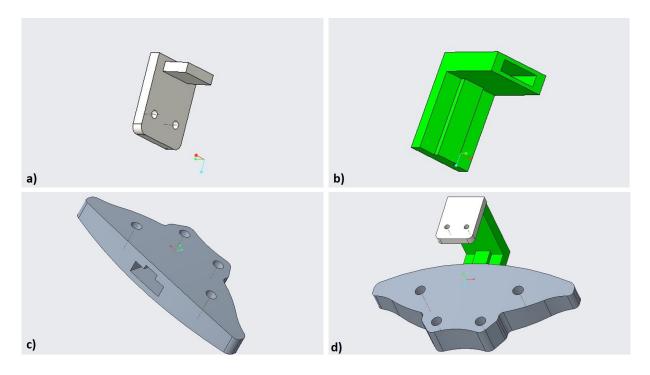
CAD design of the mount. The individual parts of the mount are shown in a) - c). d) shows the assembly of the mount.
